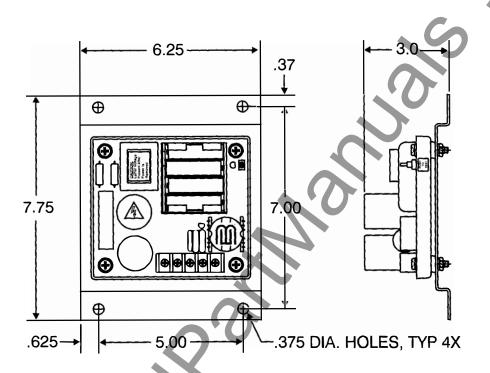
DIMENSION DRAWING, OPTIONAL CONVERSION MOUNTING PLATE FOR REPLACING BASLER MODEL ESD-200
